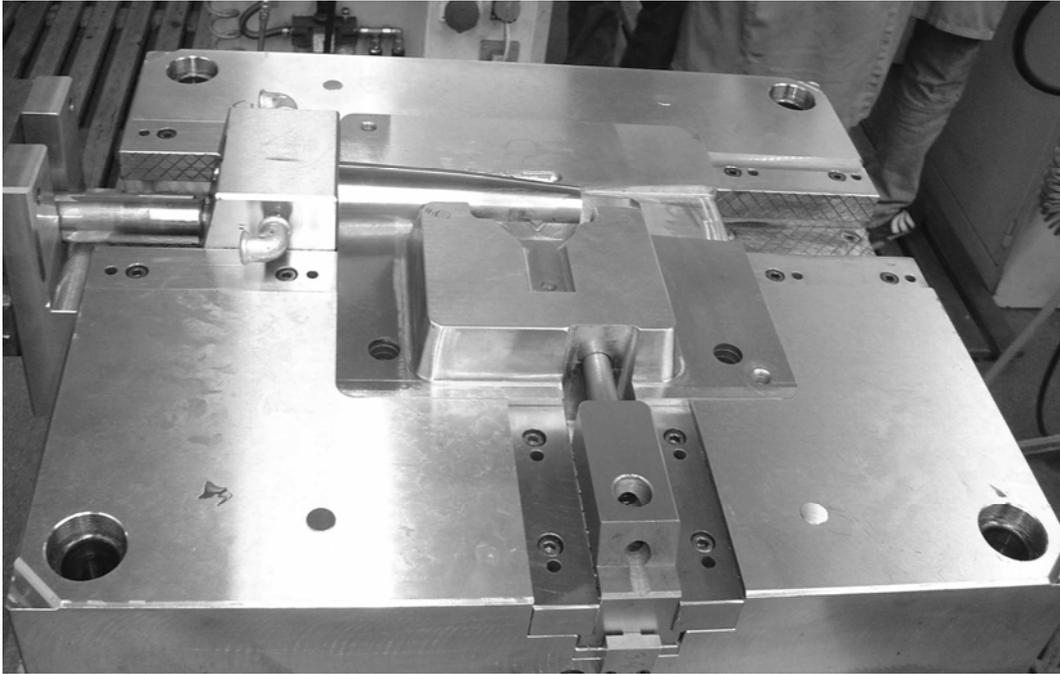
The final mould once polished, adjusted and assembled in the holding block
